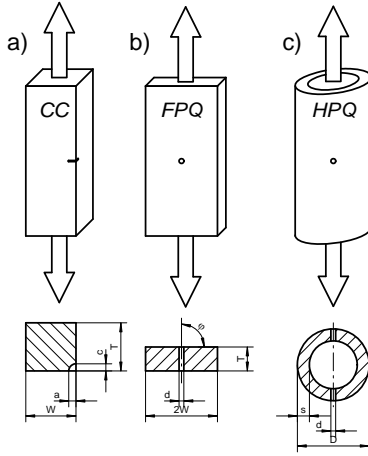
Specimen types for determination of the fatigue crack growth behavior under isothermal and thermo-mechanical load conditions, schematic: a) CC - corner crack specimen; b) FPQ – flat specimen with cross hole; c) HPQ – hollow specimen with cross hole
